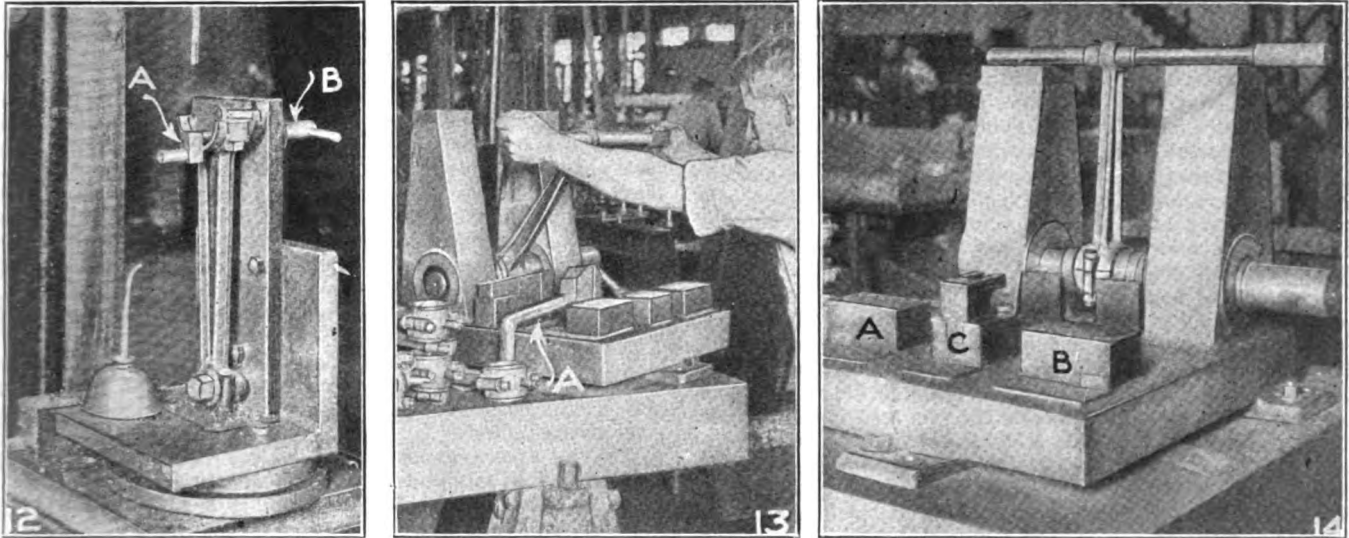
COUNTERBORING AND REAMING BOLT HOLES. FIG. 13. INSPECTING AND STRAIGHTENING. FIG. 14. THE FINAL INSPECTION
